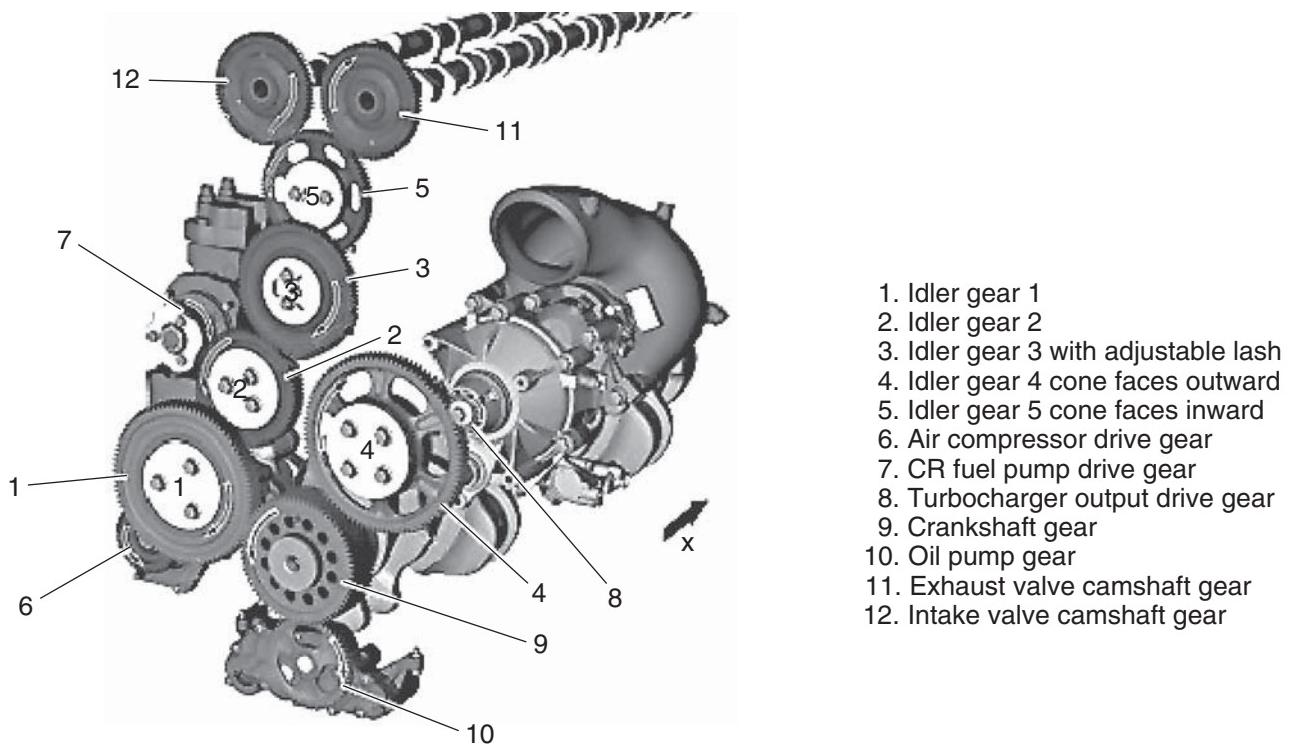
Coupling arrangement of a compound turbocharger to the engine drivetrain located at the rear of the engine.
